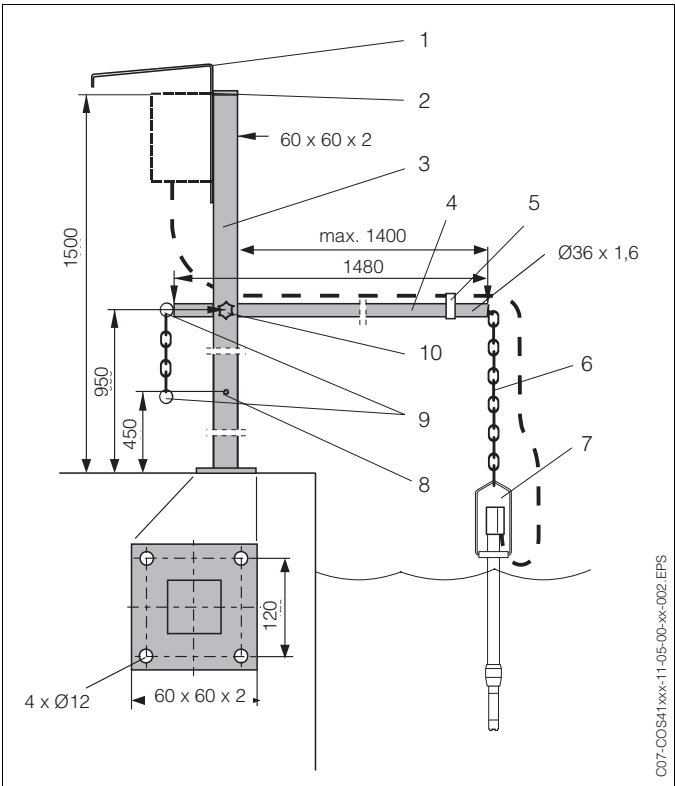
Universal assembly support CYH 101-A with immersible pendulum assembly CYA 611
